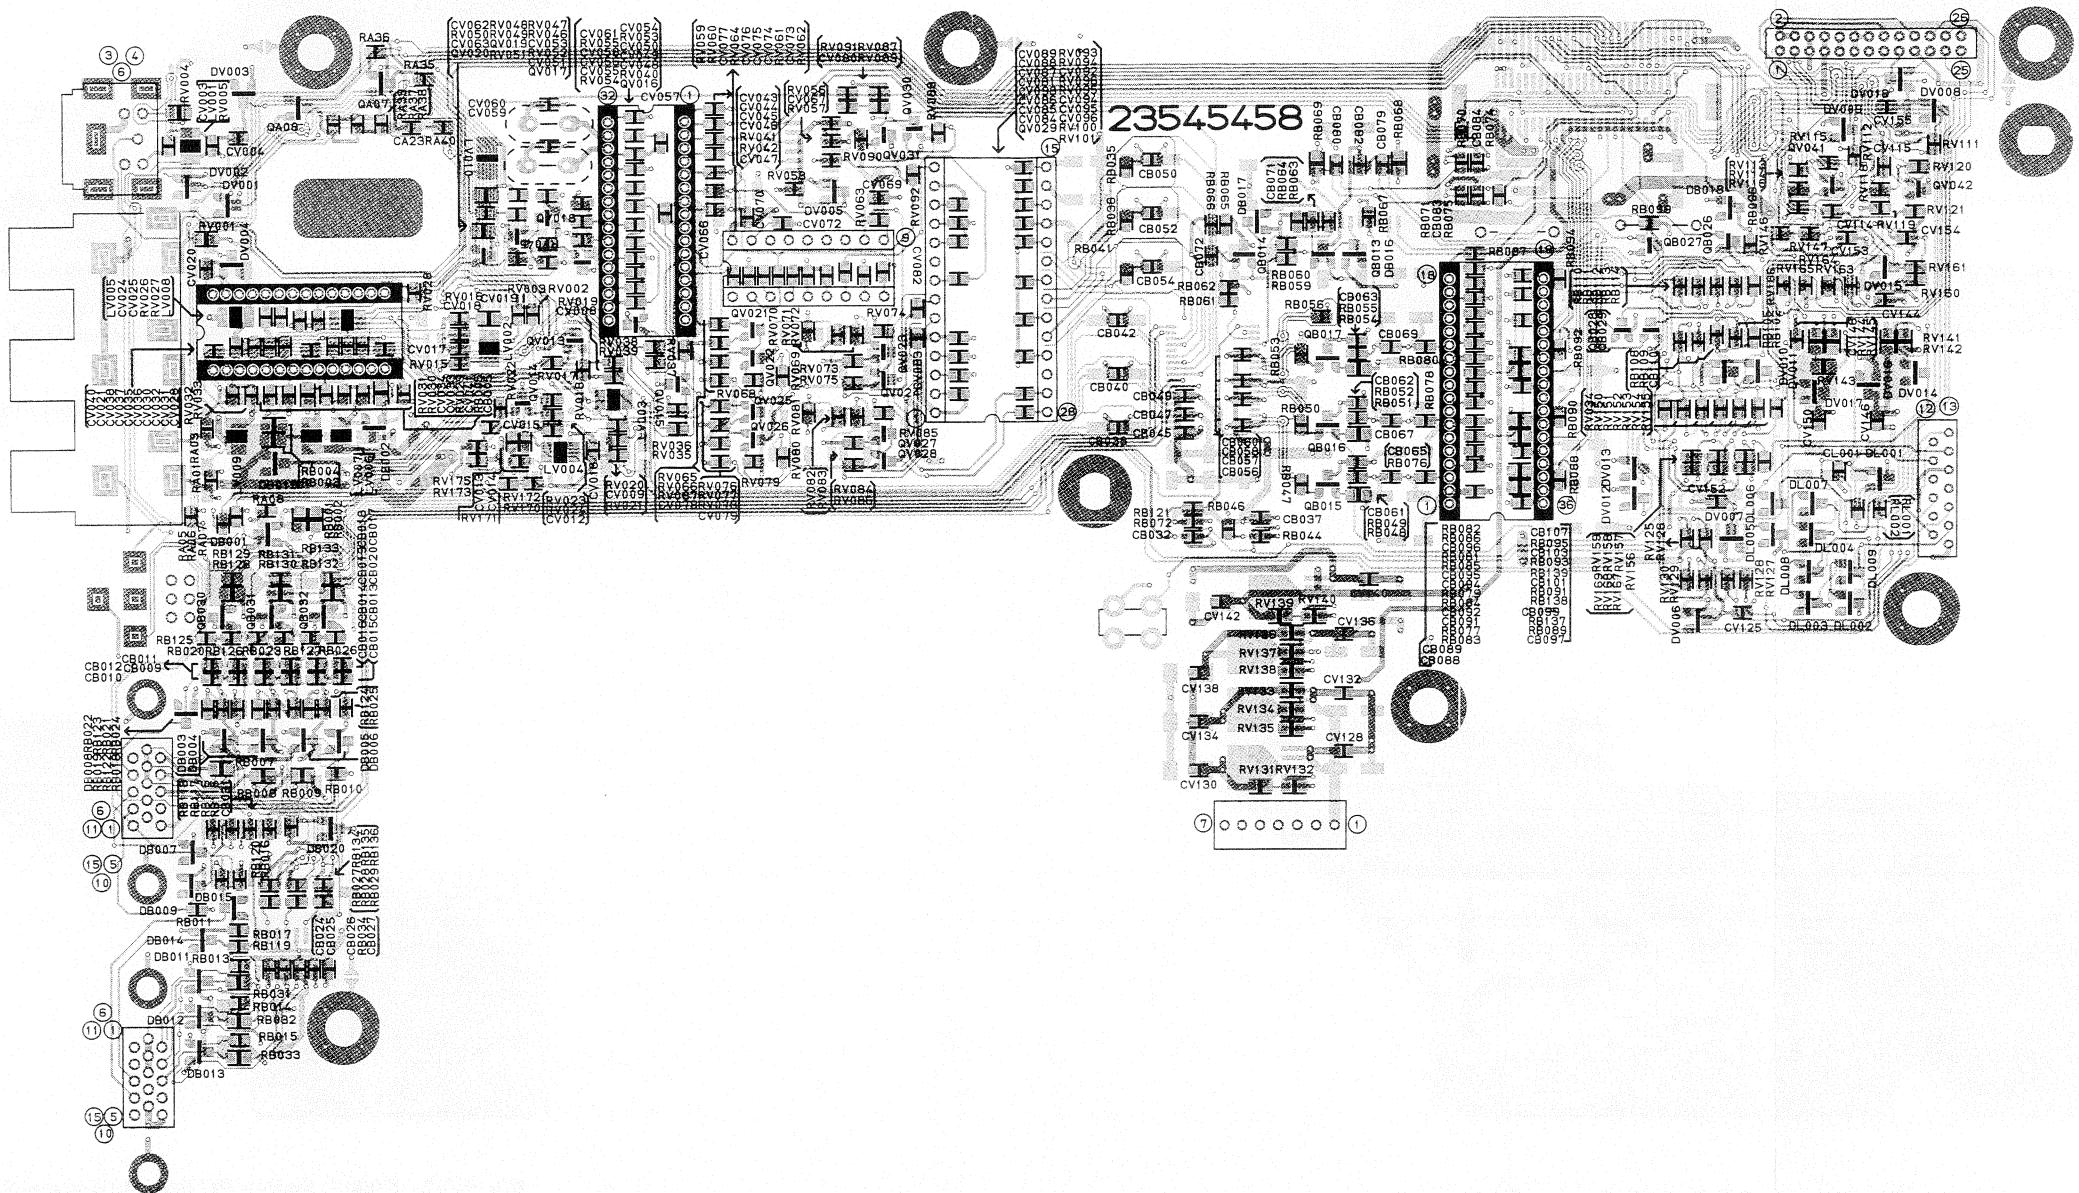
U0031 Video PC Board (Bottom Side)
